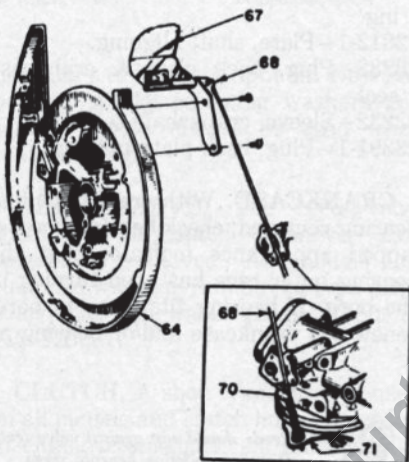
View showing governor hookup used on Super WIZ 66 and Super WIZ 80. Refer to Fig. HL215; throttle rod is connected at hole numbered (3). Governor spring (70) is compressed between bracket (71) and shoulder on governor rod.
